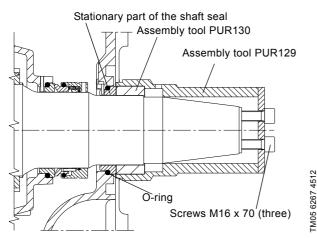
Fitting the stationary part of primary shaft seal, range 78
